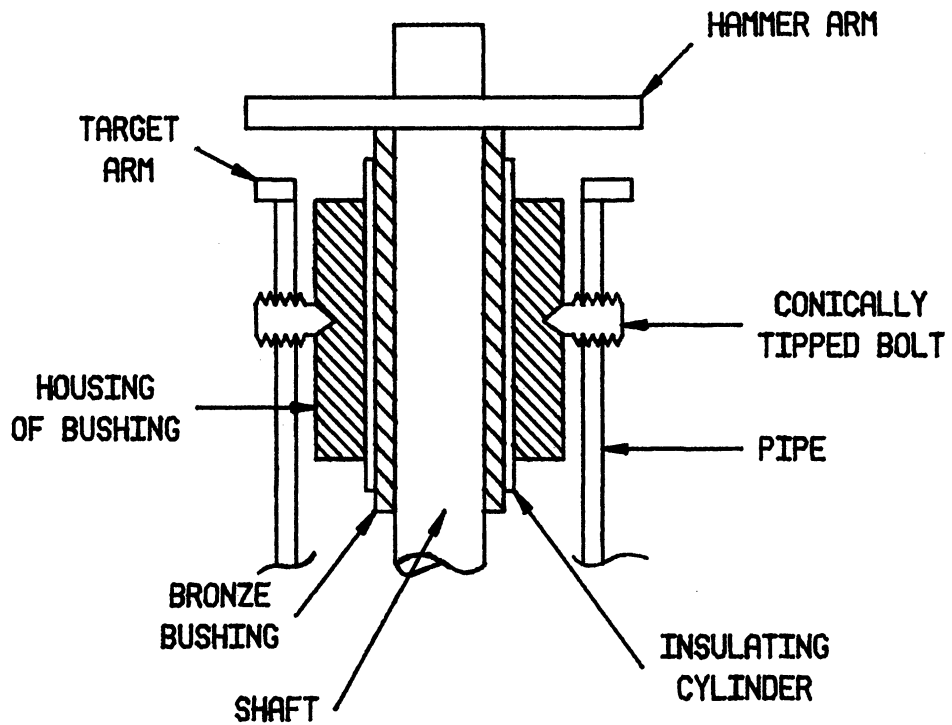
Cross Section of Bronze Bushing Assembly. Long Axis of Target Arm is Perpendicular to Plane of Diagram.
